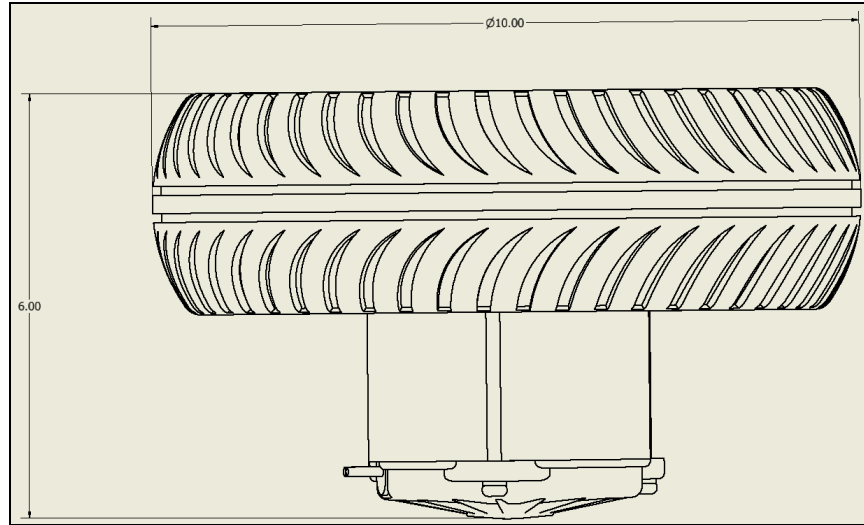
Rough dimensions of the brushed motor-flywheel interface
